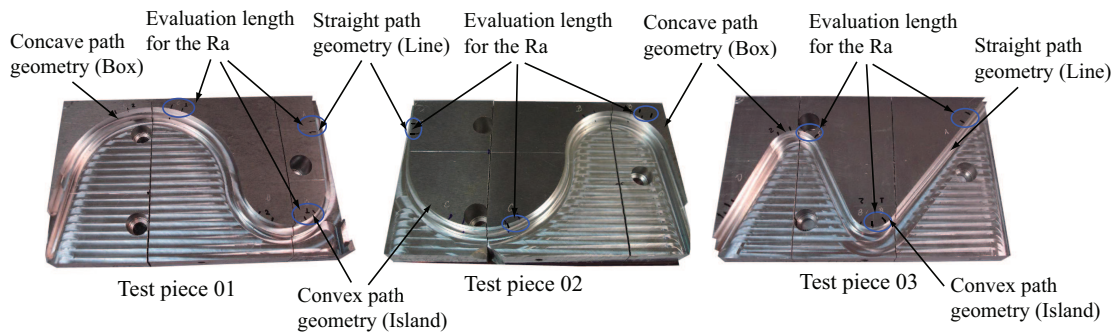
Test pieces 01, 02, and 03 with machining geometries, straight, concave and convex paths.
